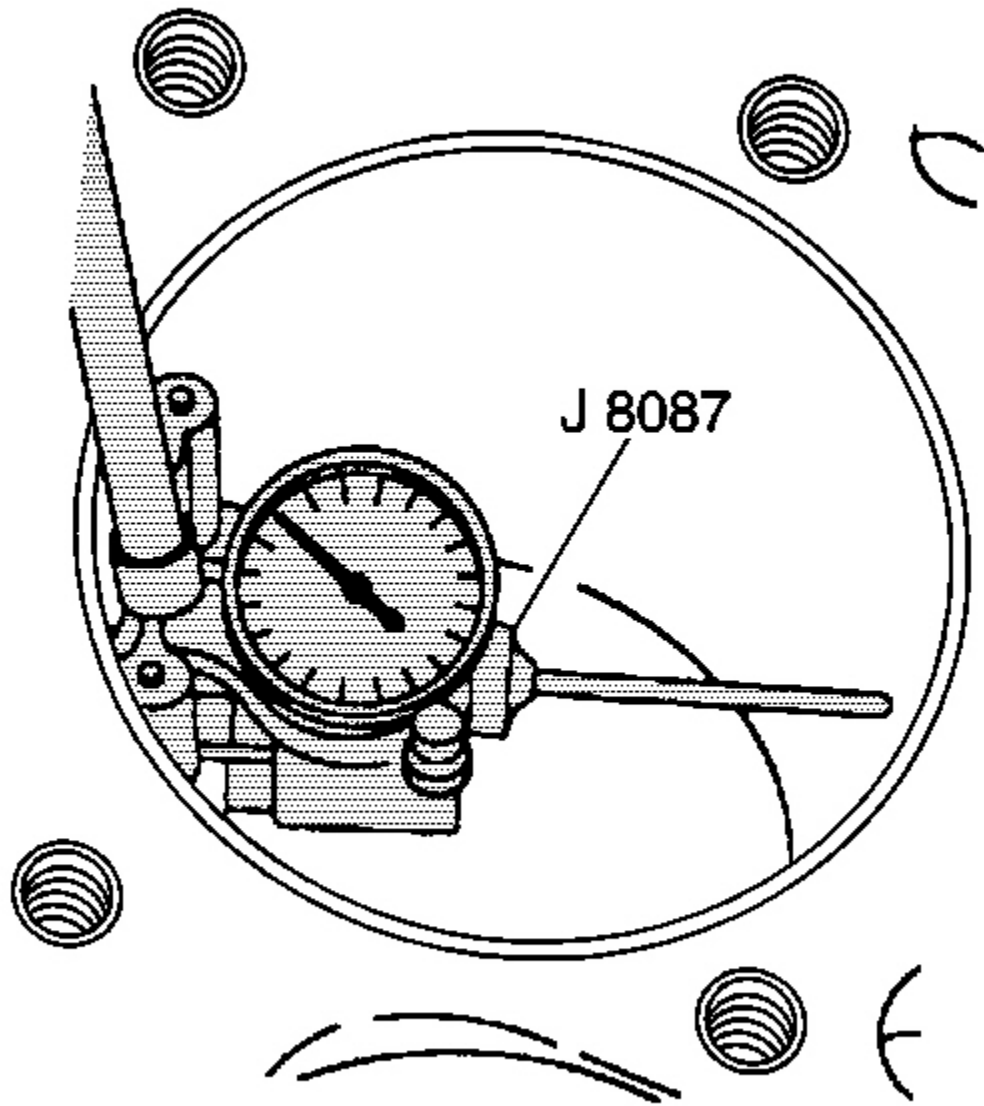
Determining The Cylinder Bore Out-Of-Round Using J 8087
